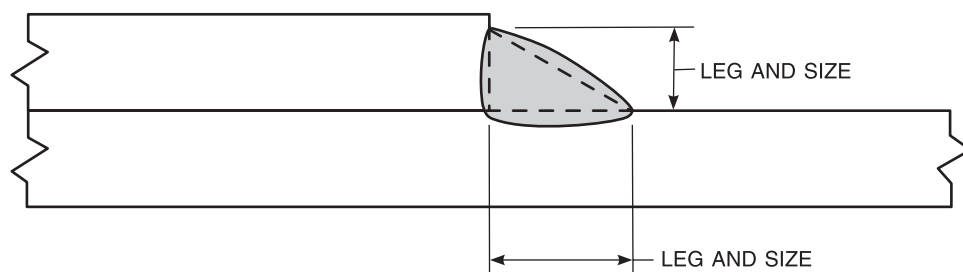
Leg Length of a Lap Fillet Weld
